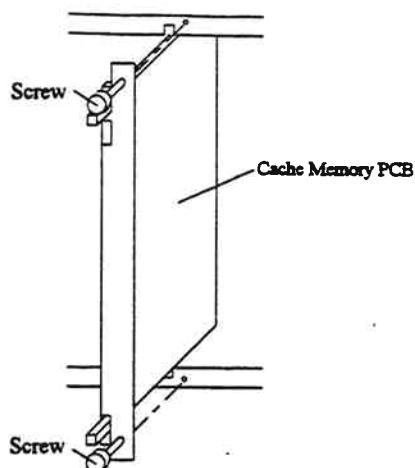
Removal of the Cache Memory PCB
